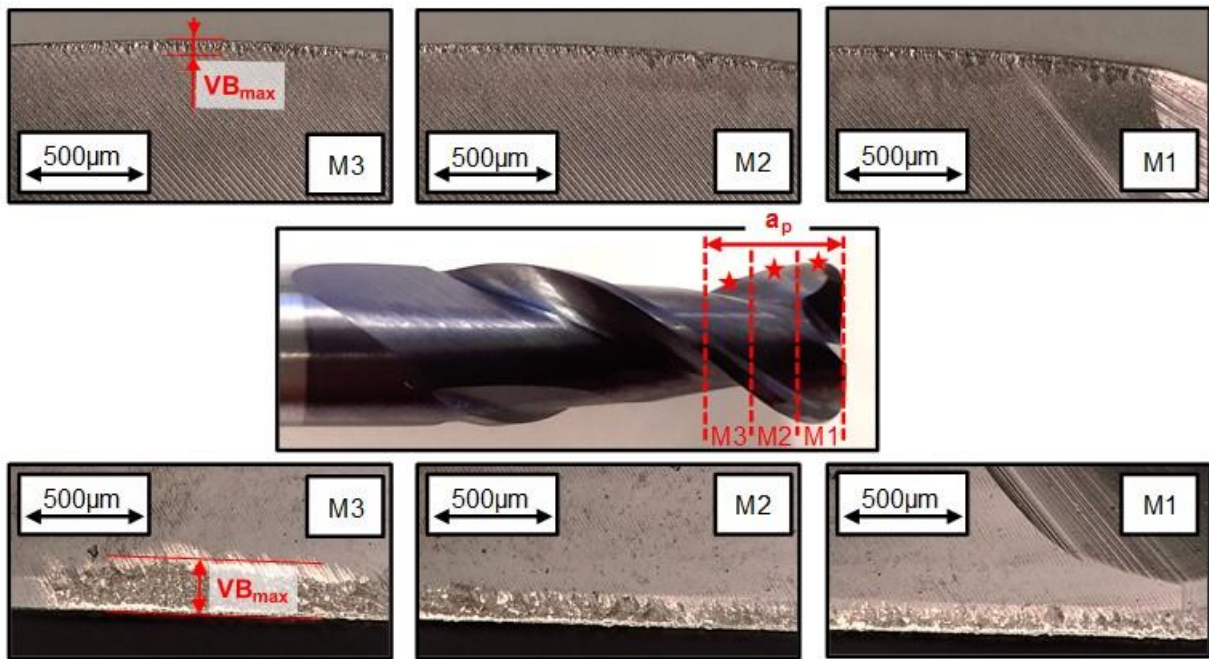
Declaration for the measurement of tool wear; shown schematically for the two-fluted cutting tool
